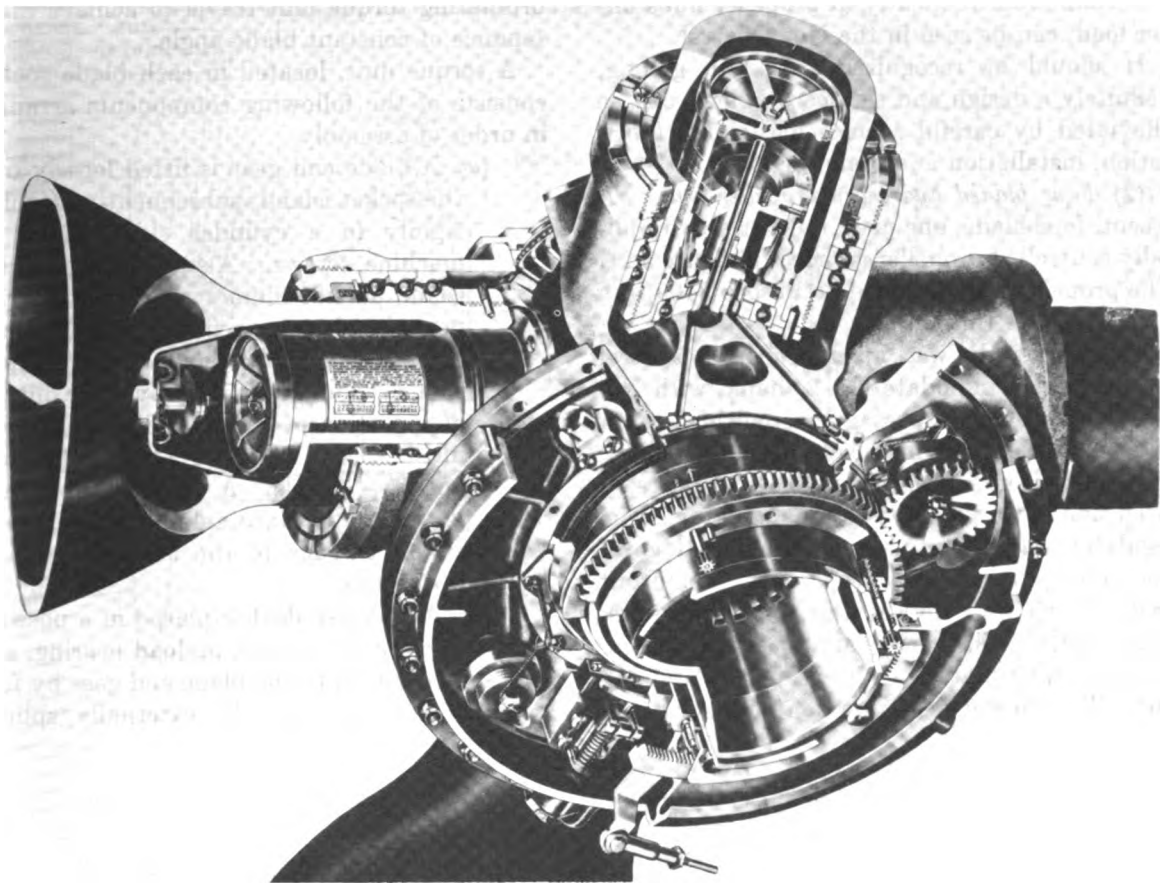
Four blade, one piece hub (hydraulic propeller).
